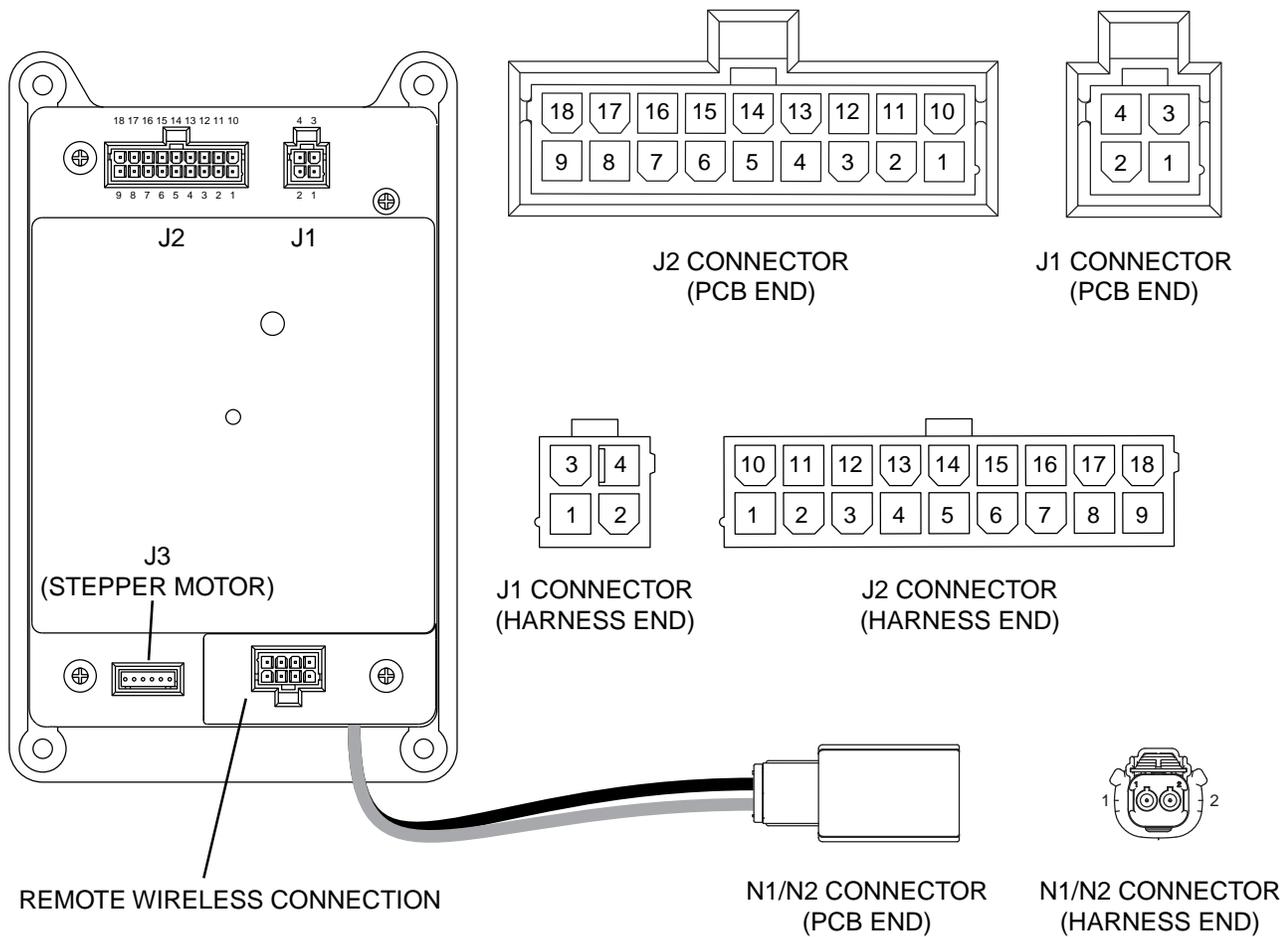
12/14 kW Printed Circuit Board and J1 Connector
